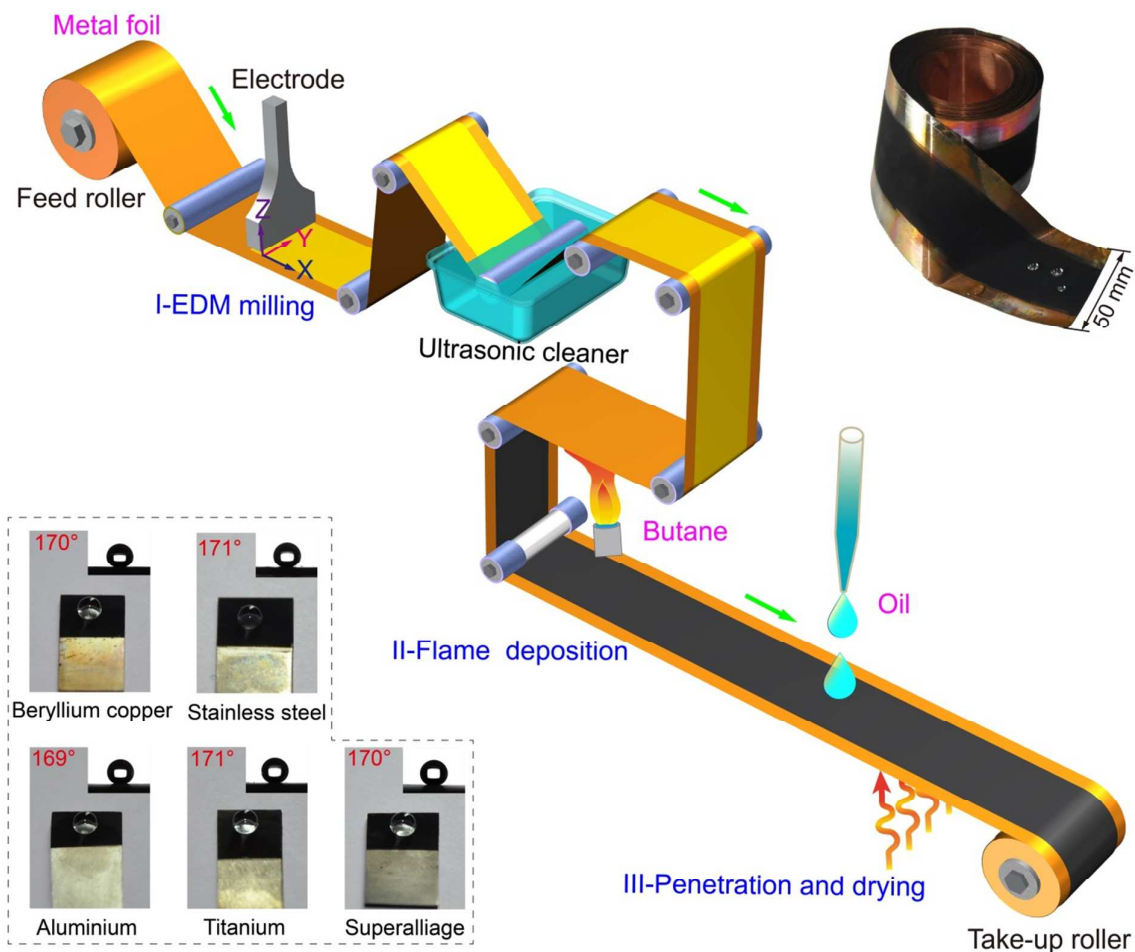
Schematic illustration of roll-to-roll strategy for manufacturing superhydrophobic coating on conventional engineering materials. Step I: Work-piece is milled by EDM process and craters are generated simultaneously. Step II: Milled surface is coated with a layer of soot by the flame of butane. Step III: kerosene penetration and drying the coatings. Inset in bottom left shows superhydrophobic coating on five types of engineering materials with CAs. Inset in top right shows a coils of superhydrophobic coated copper foil (i.e., C17200 beryllium copper alloy).
